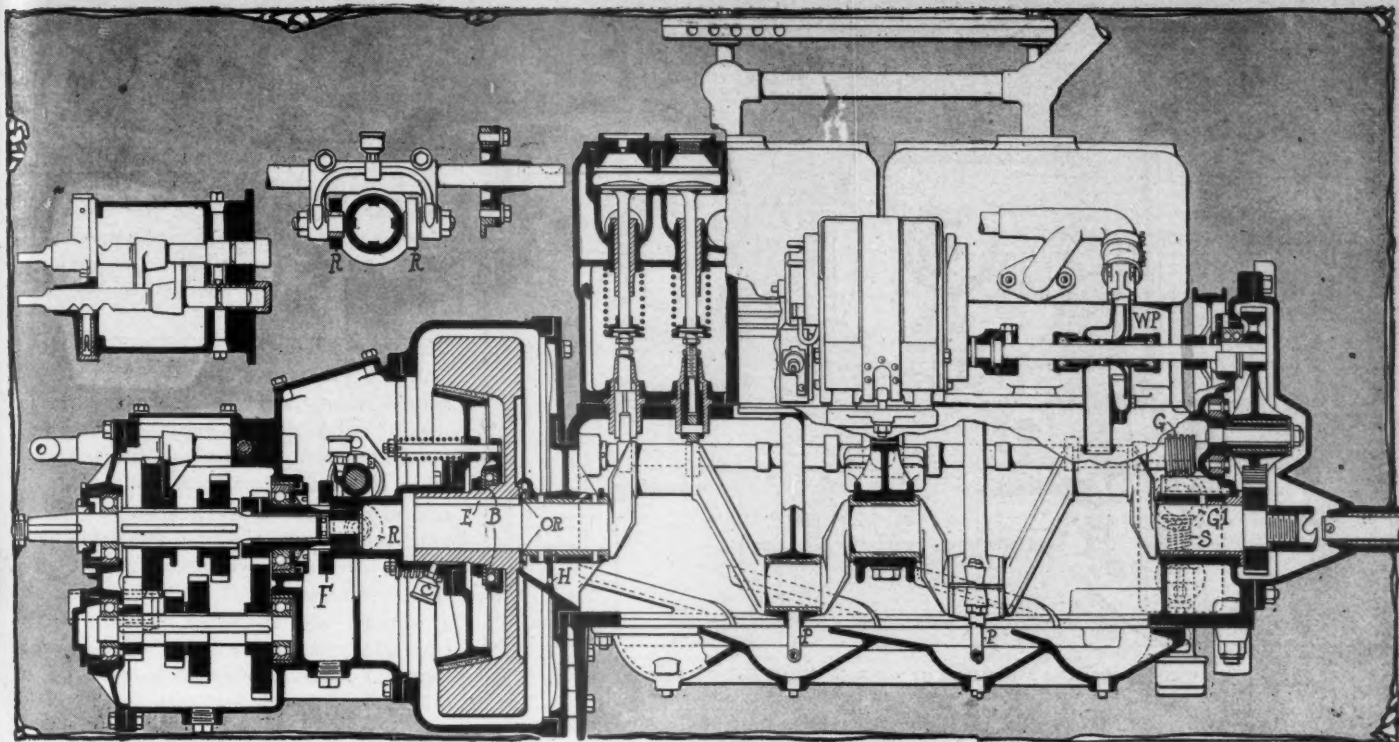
SECTIONAL DRAWING OF 1911 COLE 30 POWER PLANT
